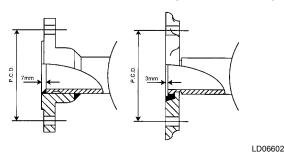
VICTAULIC - ADAPTER FLANGES
